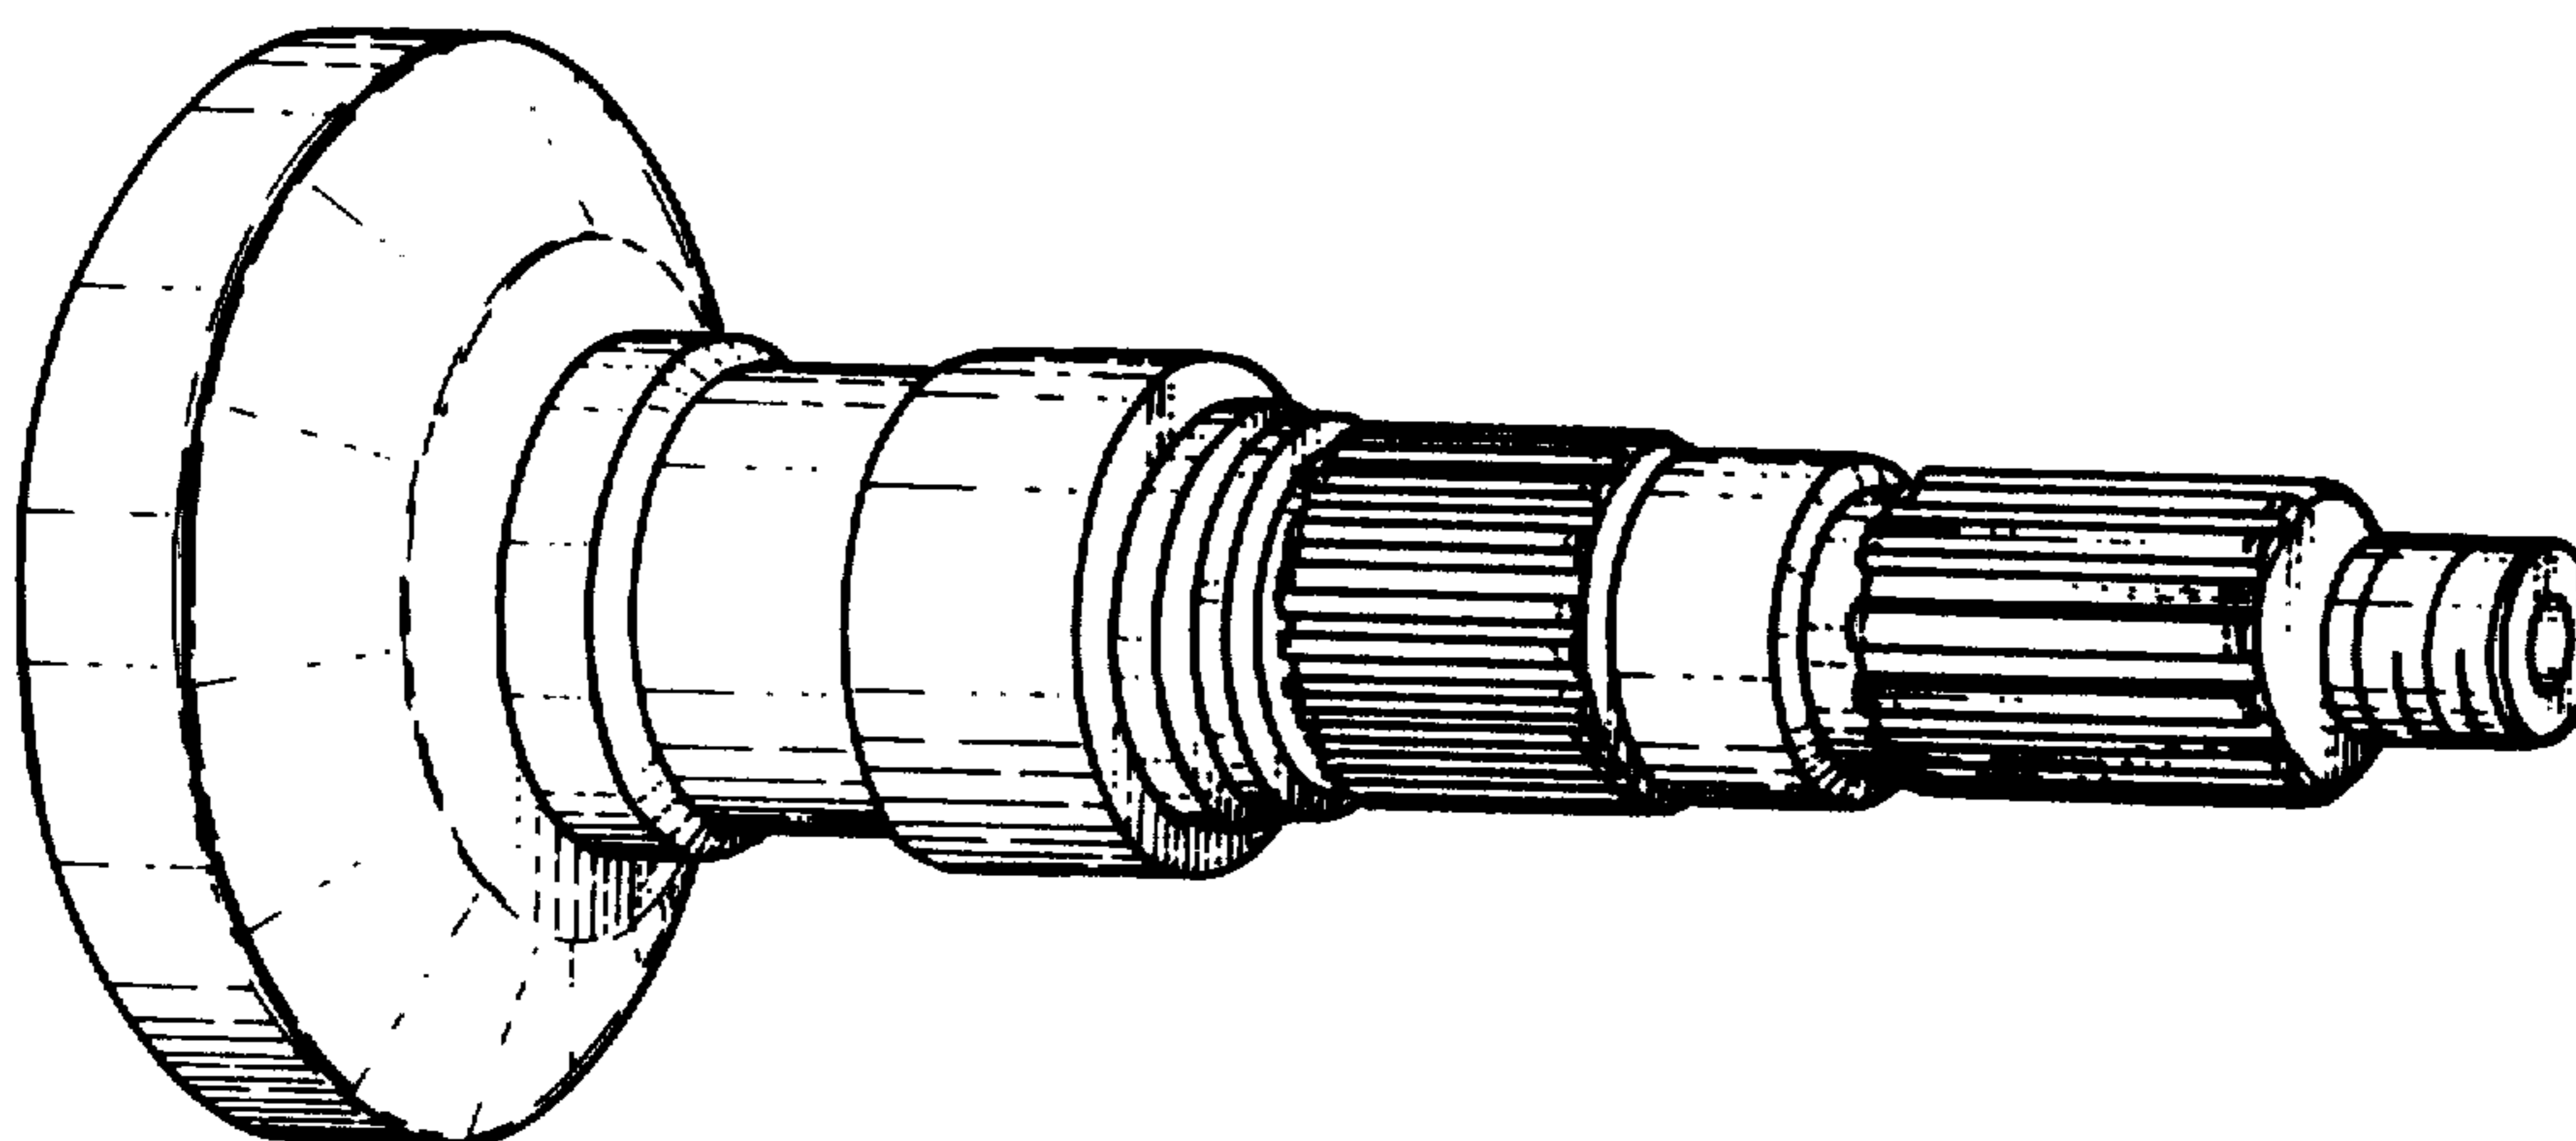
is a rearward perspective view of a four-wheel drive transfer case shaft extender showing my new design;
